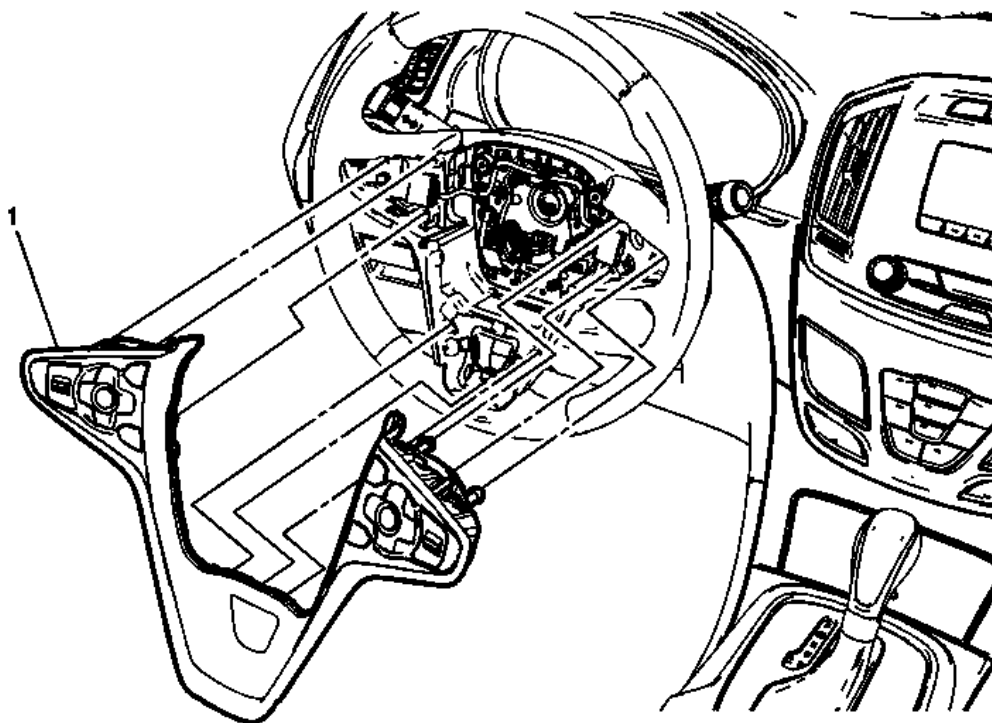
Steering Wheel Spoke Lower Cover (Except Grand Sport)
